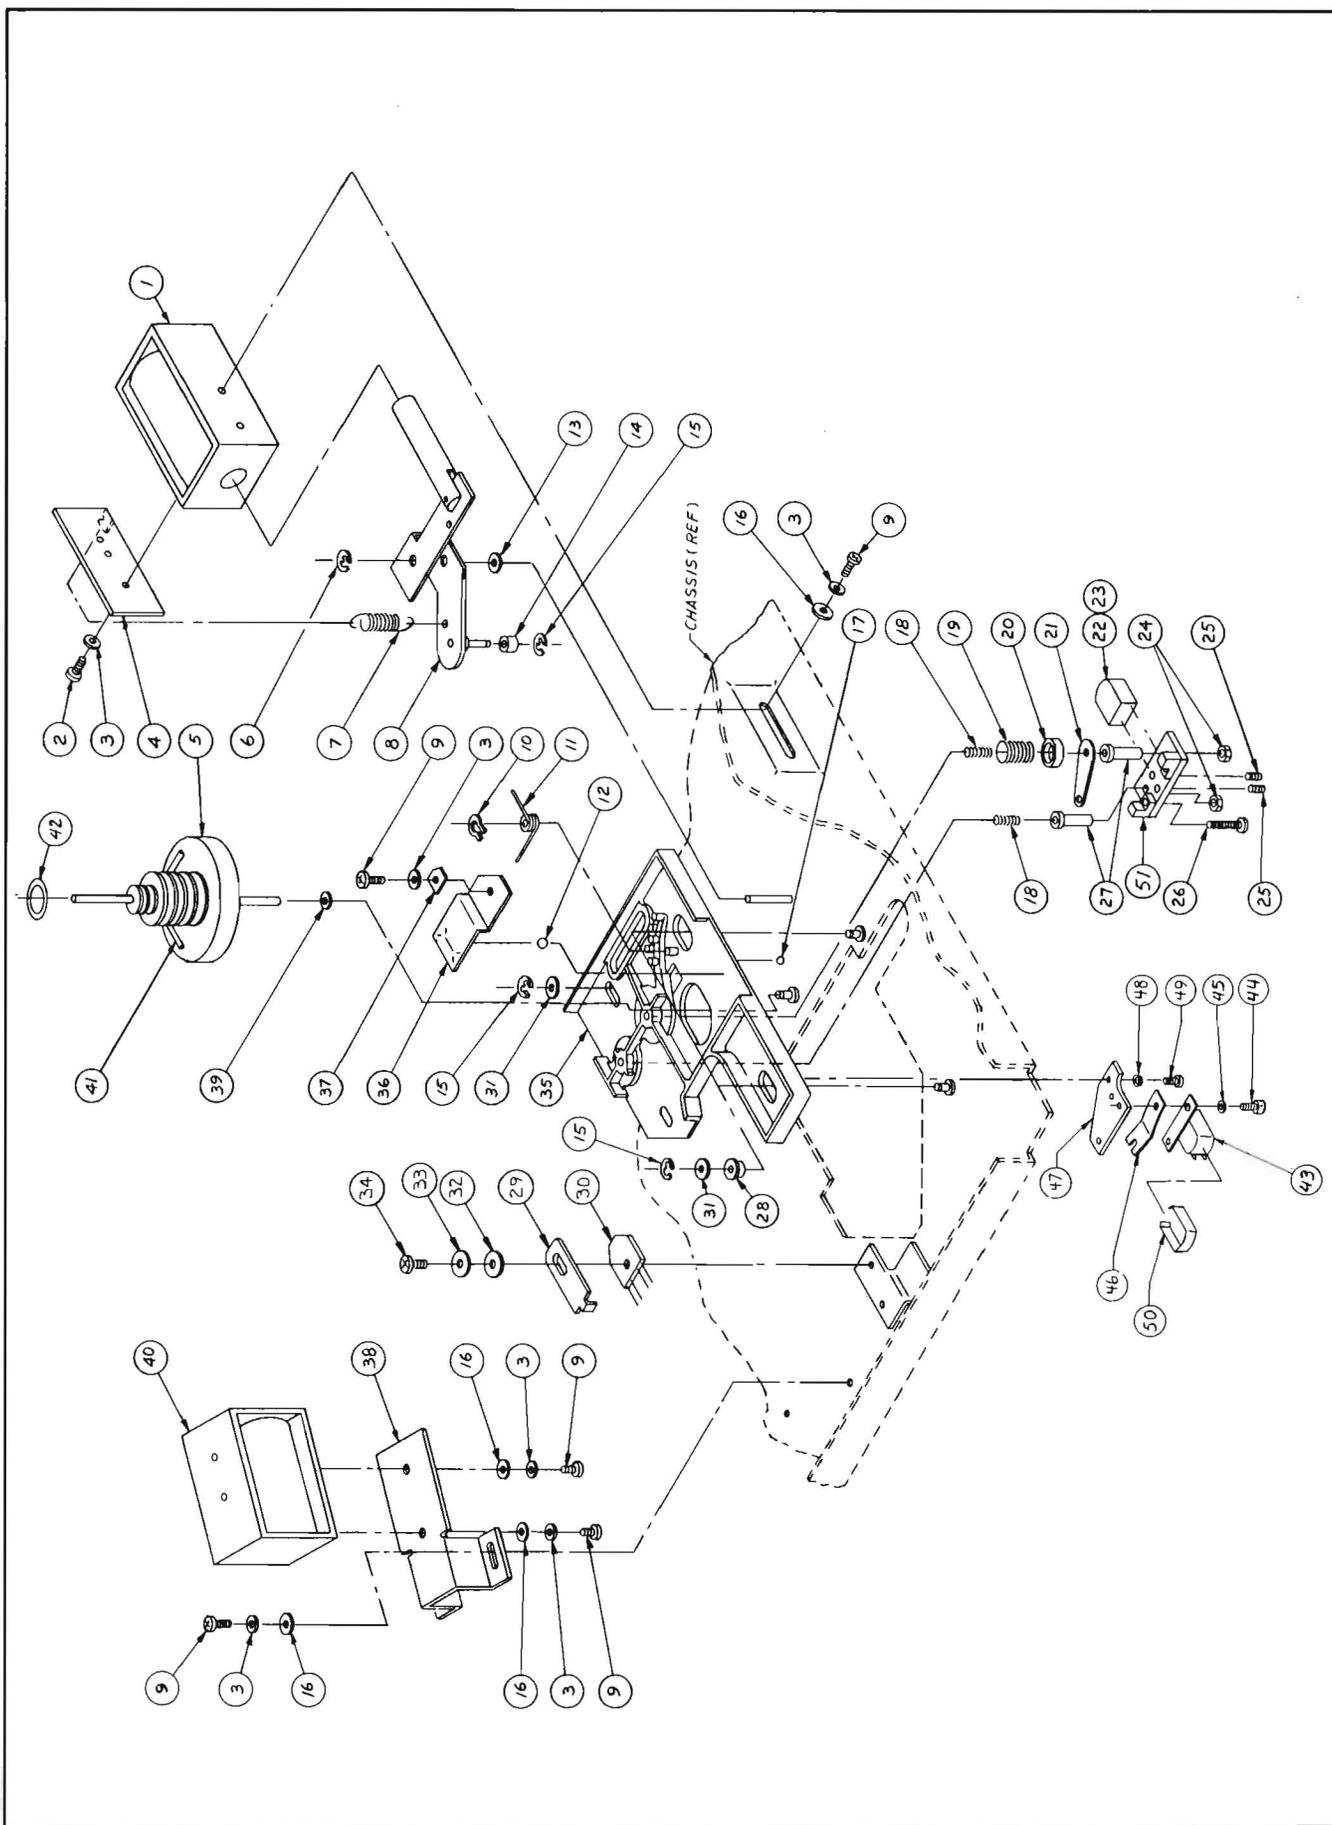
Cassette Head Plate Exploded View - Master Position
